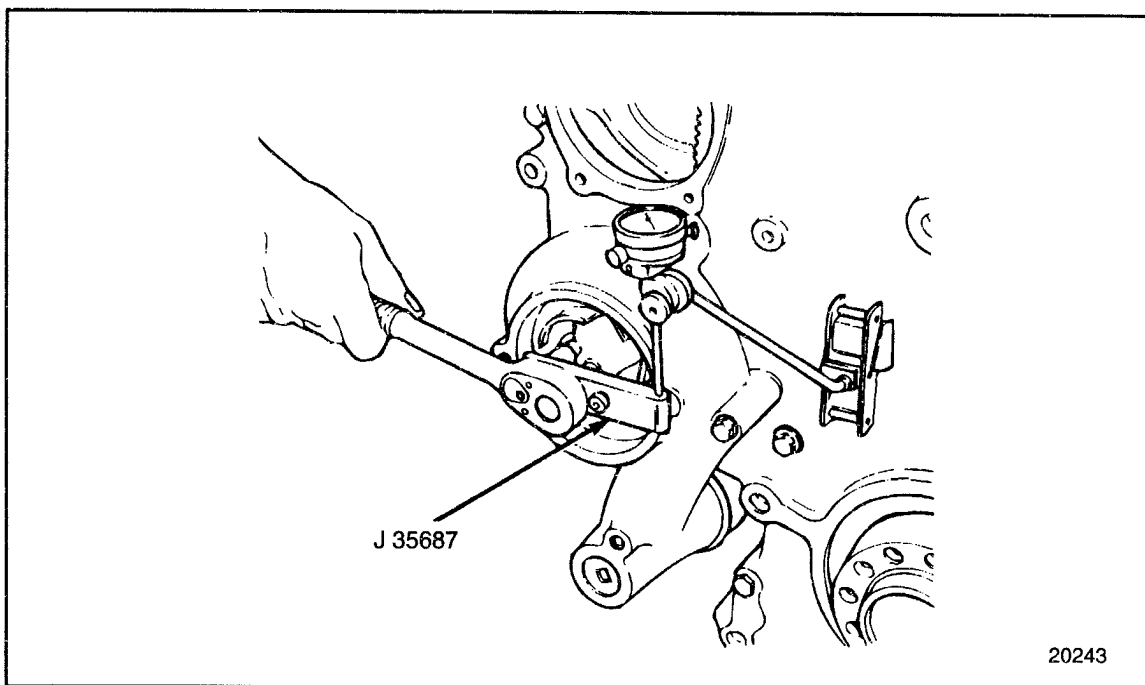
Water Pump Drive Gear Lash Measurement
